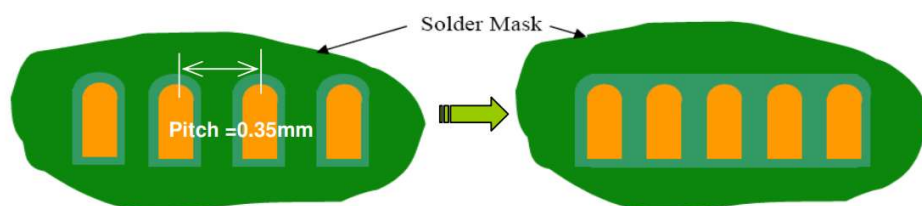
between the pads, it's recommended to use “trench” type solder mask opening to design.
